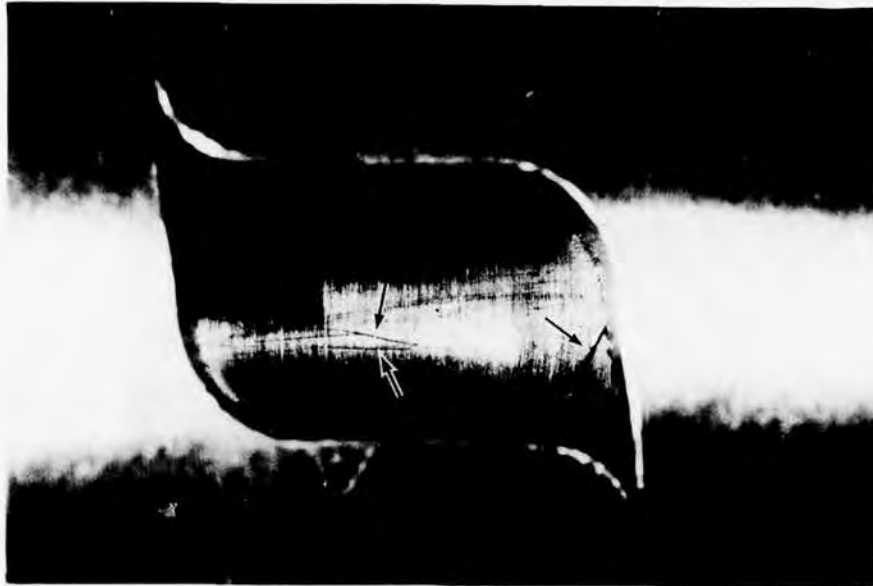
Spring Clutch Center Coil Hole, Static-Cyclic Test.
